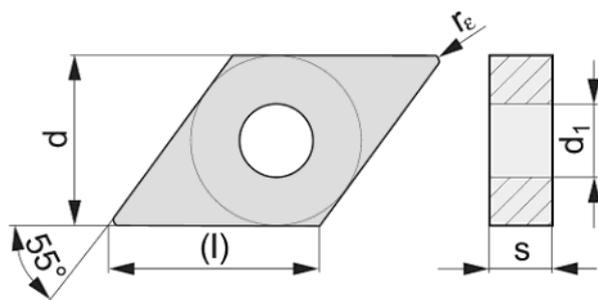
Dimensions of the DNMG 150608 insert (Pramet, 2012)
